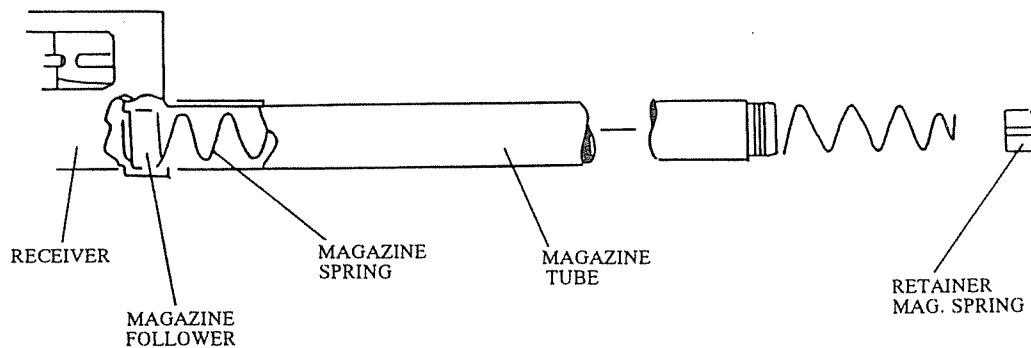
MAGAZINE RETAINER SPRING AND FOLLOWER REMOVAL
